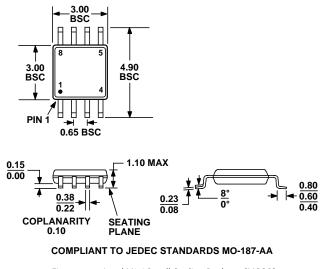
8-Lead Mini Small Outline Package [MSOP] (RM-8) Dimensions shown in millimeters
